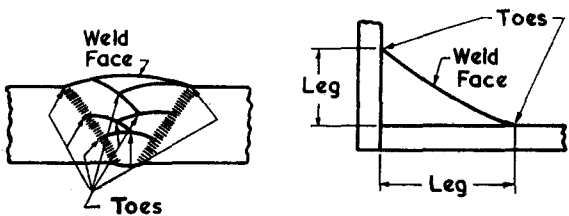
EXAMPLES OF WELD FACES, TOES AND LEGS
